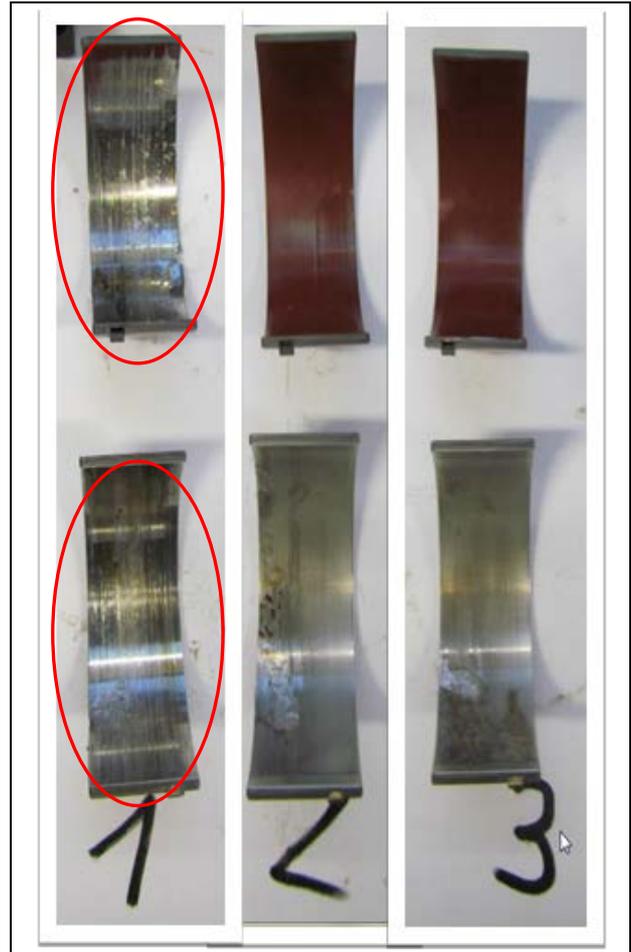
bearing half shelves for the 3-cylinder engine after a MIG16 shut off. Bearing number 1 shows clear abrasive marks.
